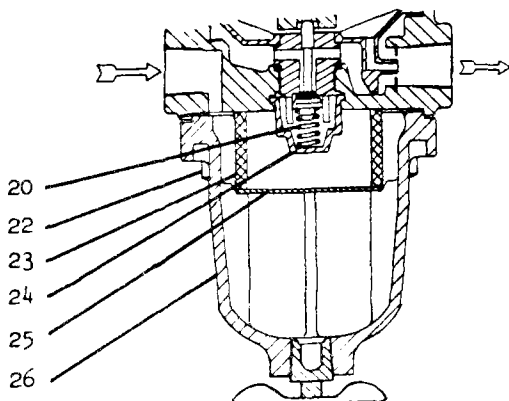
PARTIAL ASSEMBLY OF AF-2 TYPE SHOWING ADDITIONAL PARTS IN FILTER ASSEMBLY.
